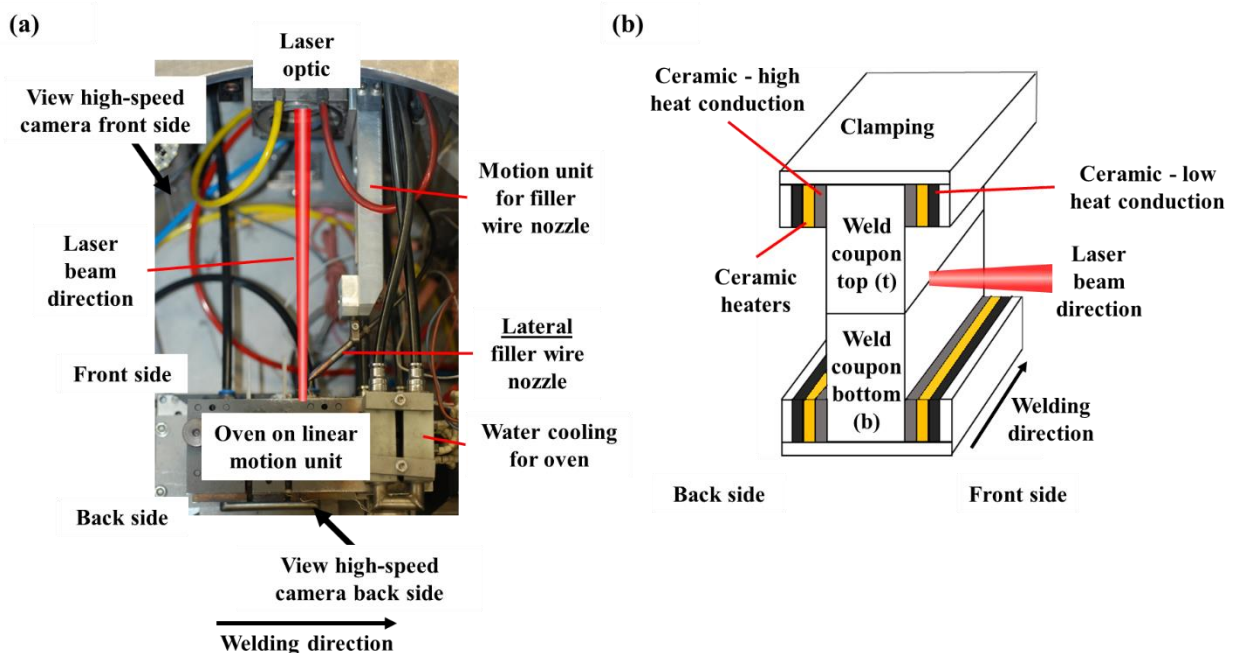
Experimental setup for similar and dissimilar TNM joints welded in out-of-position. (a) Top view. (b) Schematic setup of oven.
